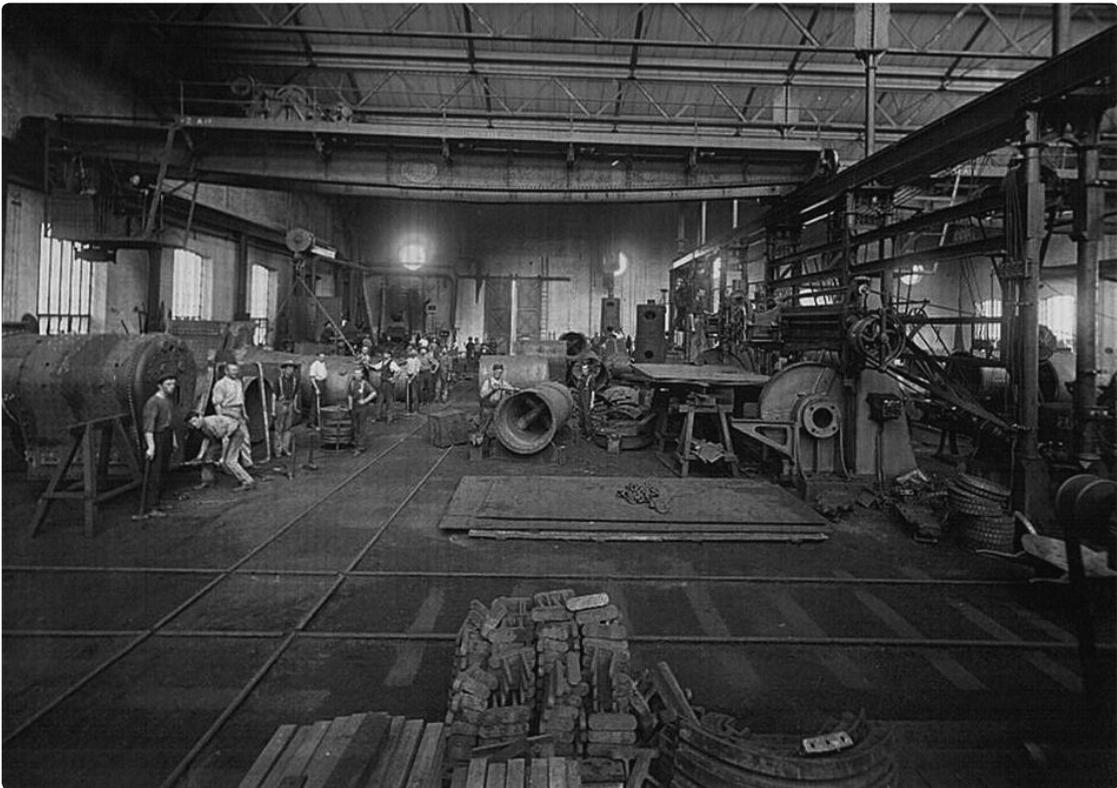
Boilers under construction in the Boiler Shop. Image courtesy Whitehead Studios.
